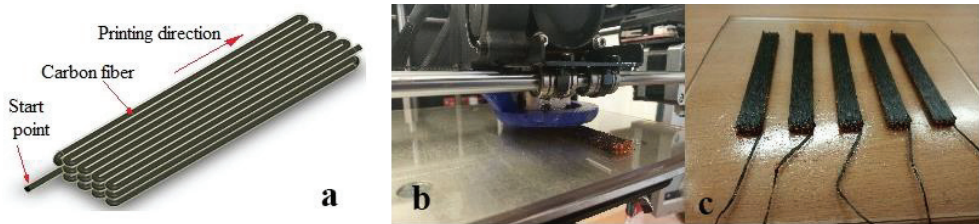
Scheme of the designed printing head and printing process: a – 3D printing path; b – Printing process; c – Printed samples
